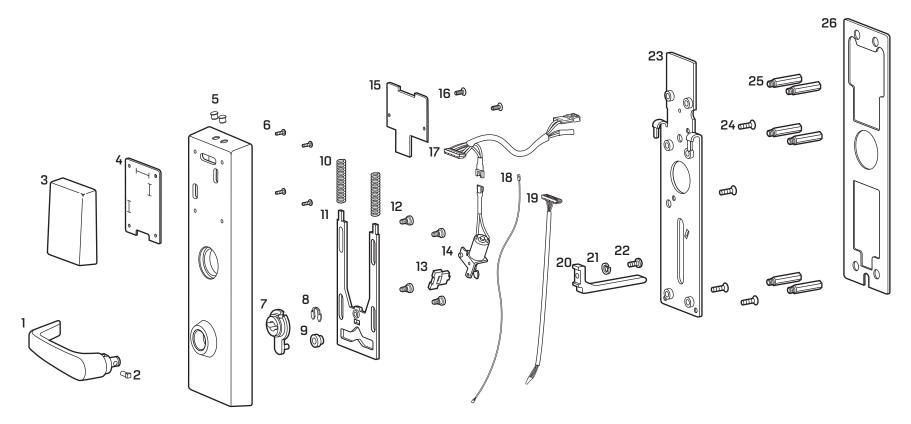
Proximity reader escutcheon assembly (BEST Precision Hardware-rim type shown)
